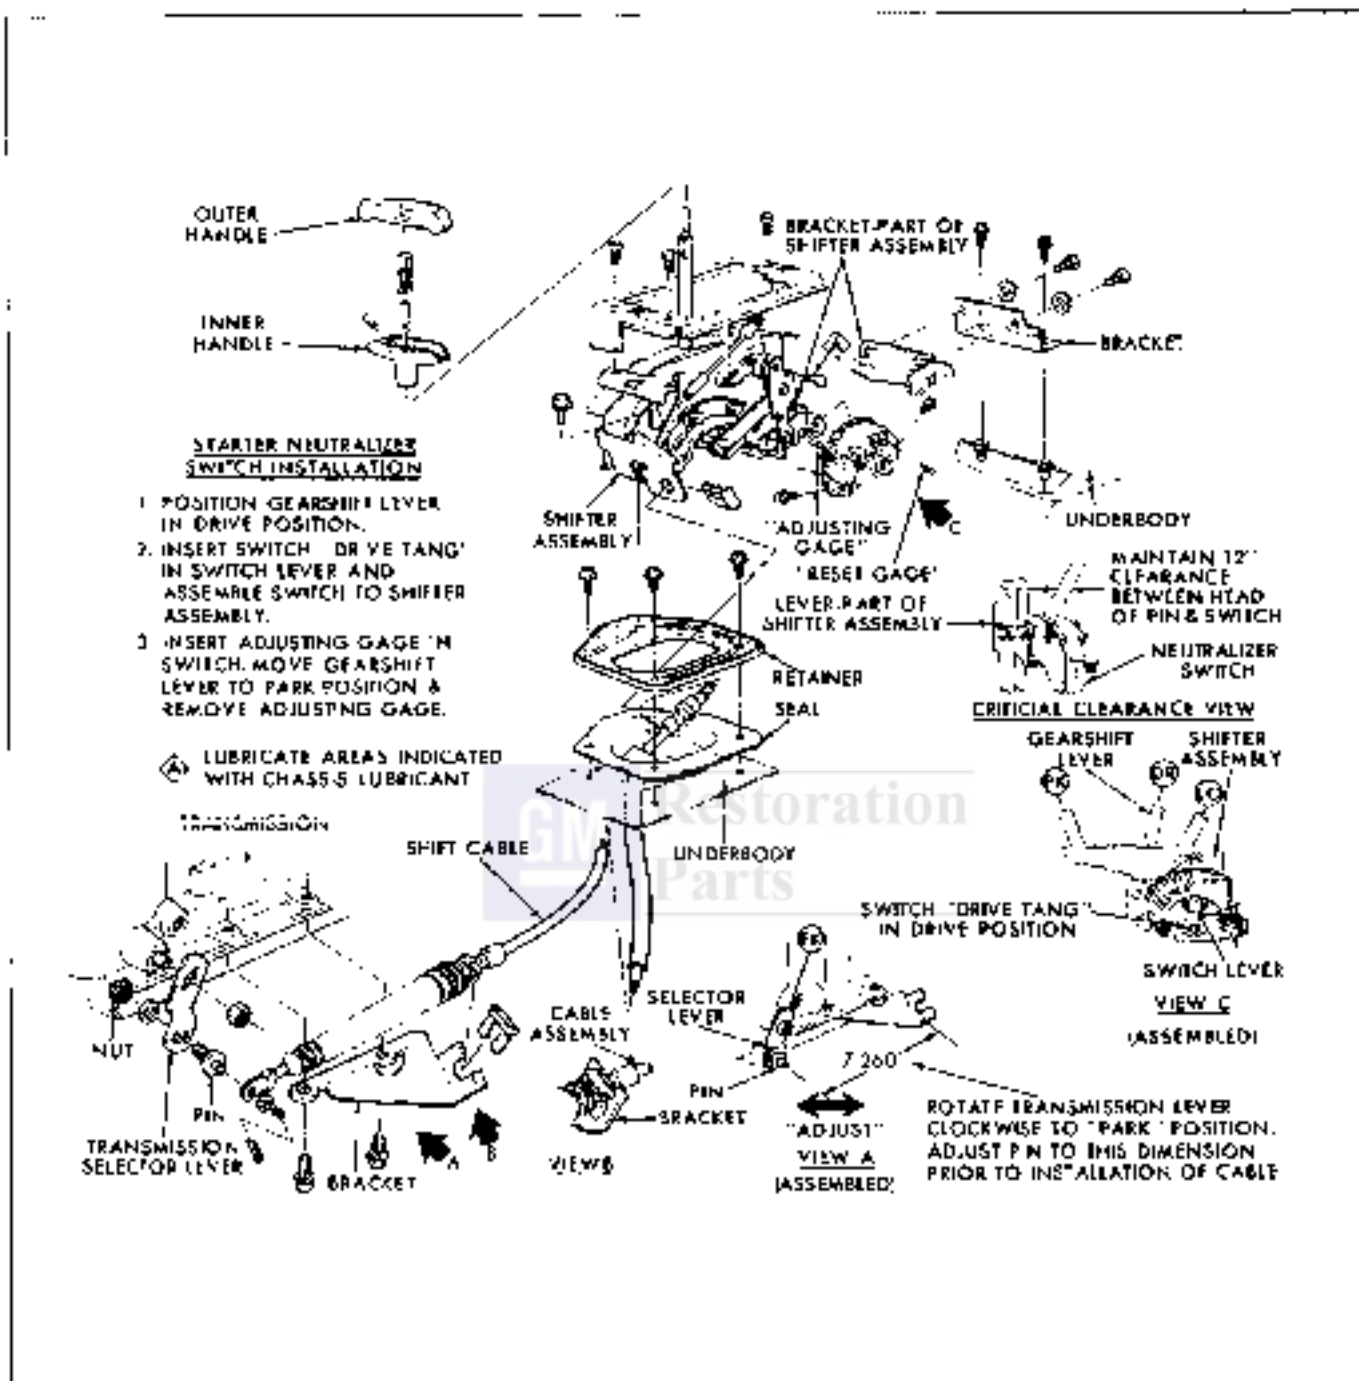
E-8 Gearshift Controls (Console) - Firebird
